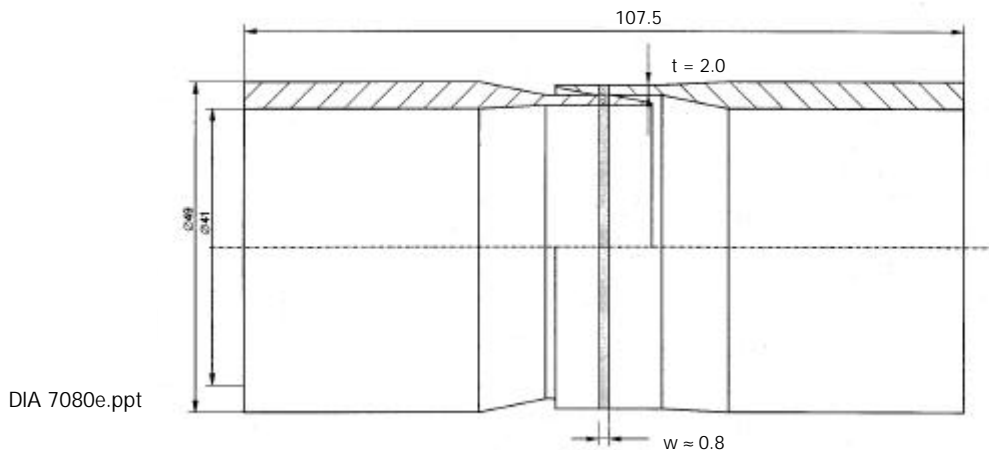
Laser beam welded, overlapped tube-tube specimen
